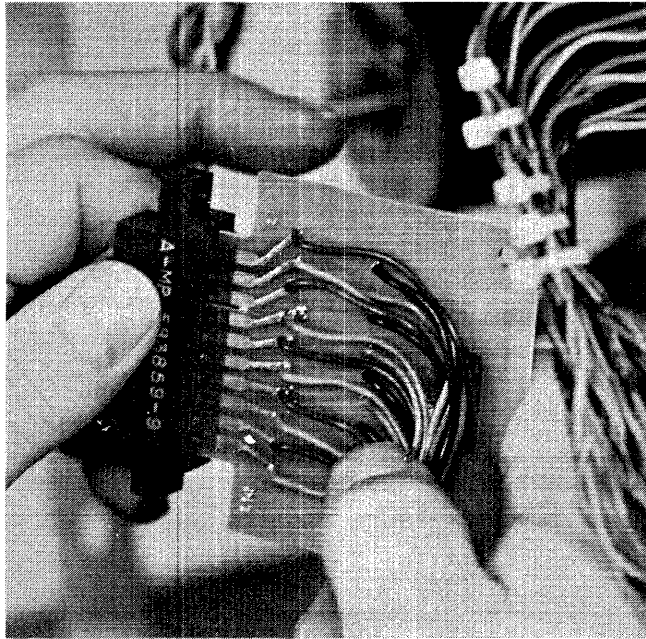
DRIVE EXTENDER CABLE ATTACHMENT
